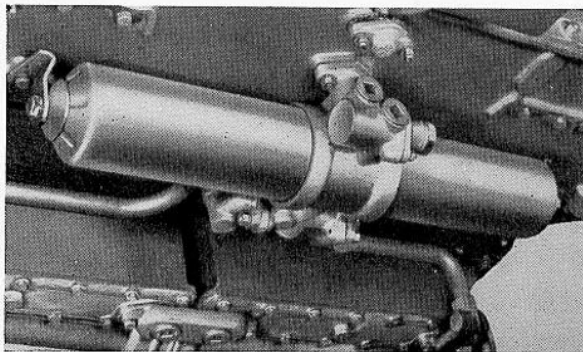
PUROLATOR OIL FILTER SHOWING CONNECTION TO MAIN OIL GALLERY
